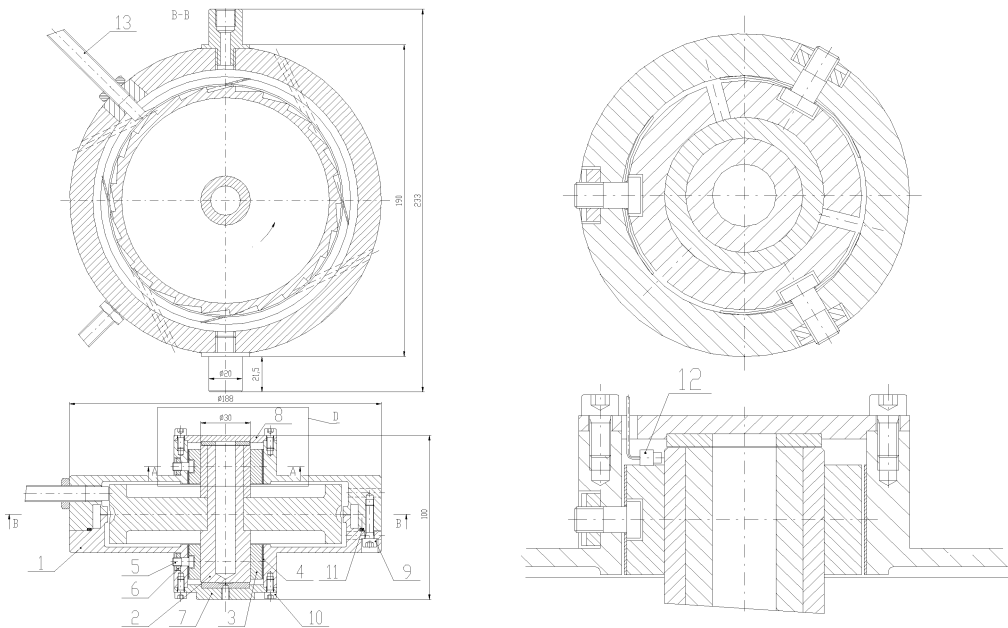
Power gyro supported in gas lubricated bearings with relative sensors
